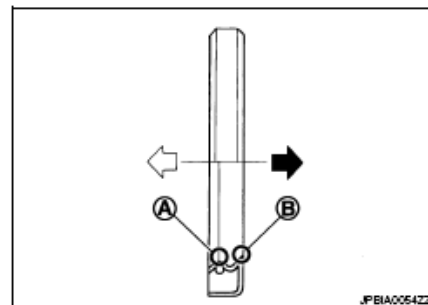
Identifying Rear Oil Seal On Rear Oil Seal Retainer
